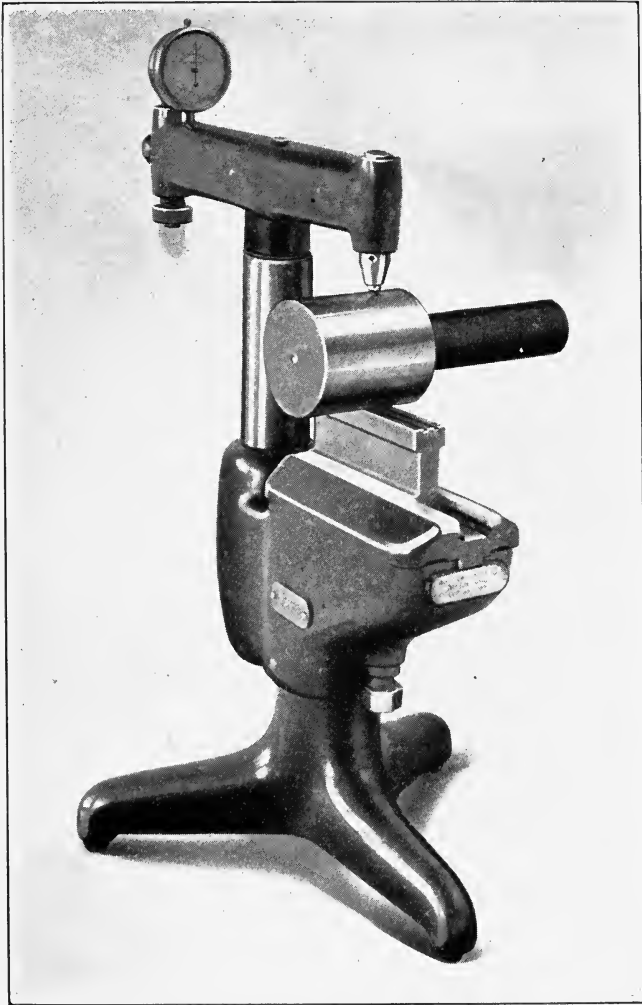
Amplifying Gage which permits the Rapid Inspection of a Large Variety of Surfaces
